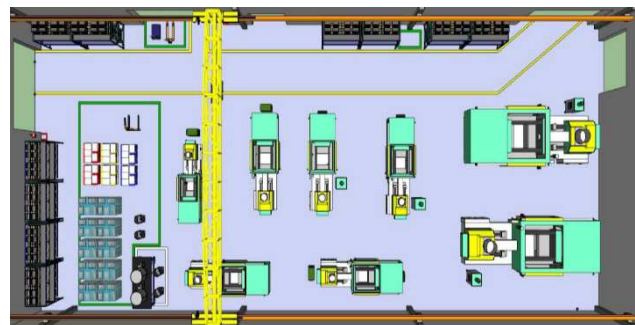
A view of the operation of injection moulding machines with proposed solutions
